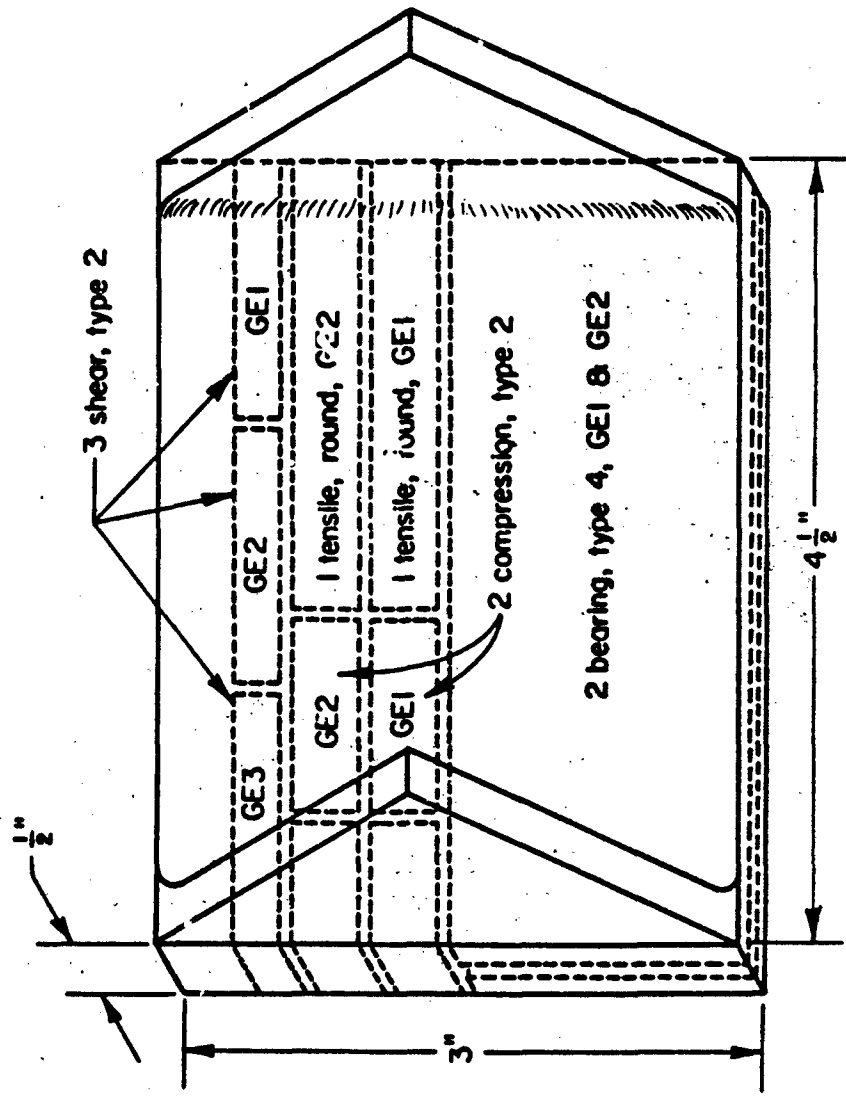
LOCATION OF TEST SPECIMENS FOR CASTING GE
